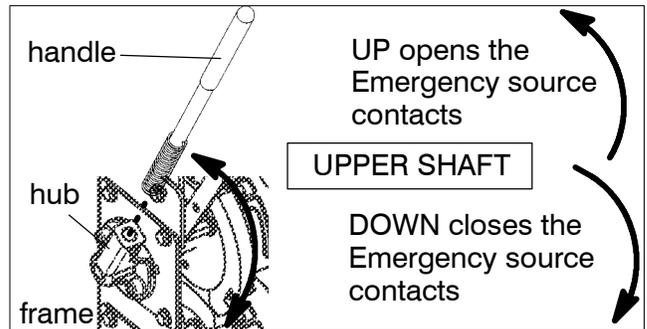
Emergency (upper shaft) operation on 800-1200 amp. H-design transfer switches.
